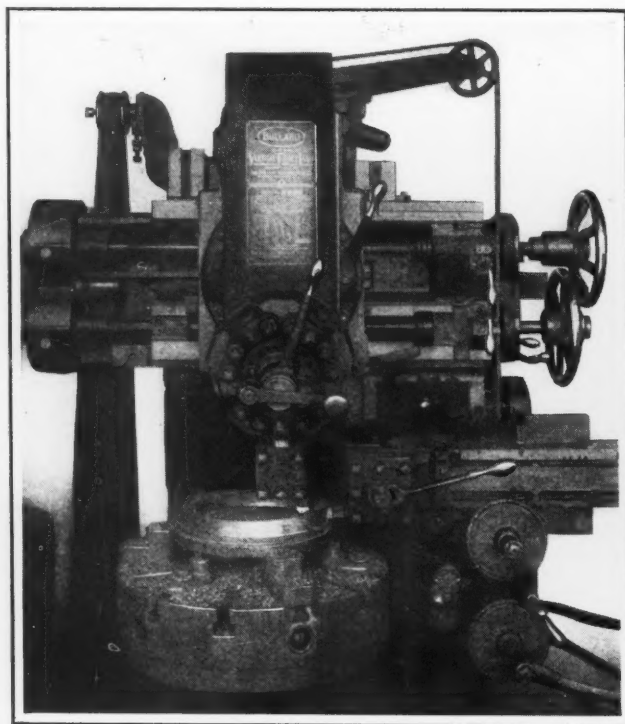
First Chucking in the Vertical Turret Lathe—roughing the Clutch Side of the Flywheel
